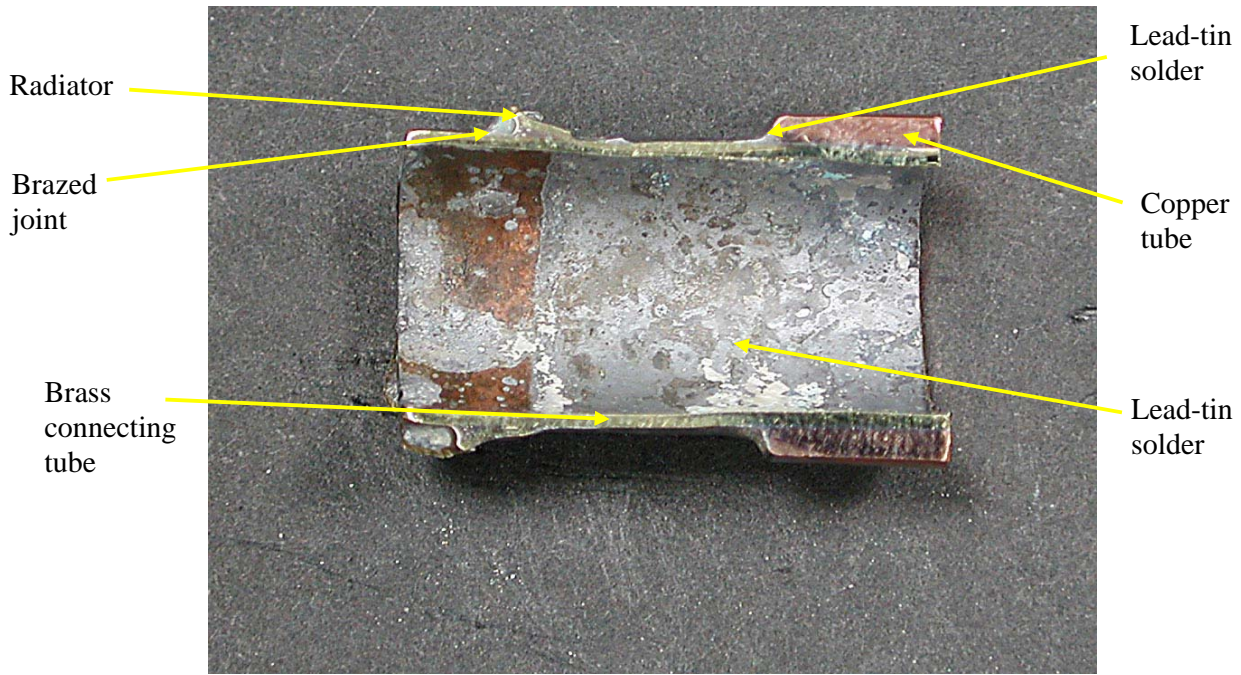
Detailed view of fracture surface on radiator (photo courtesy of QinetiQ)
